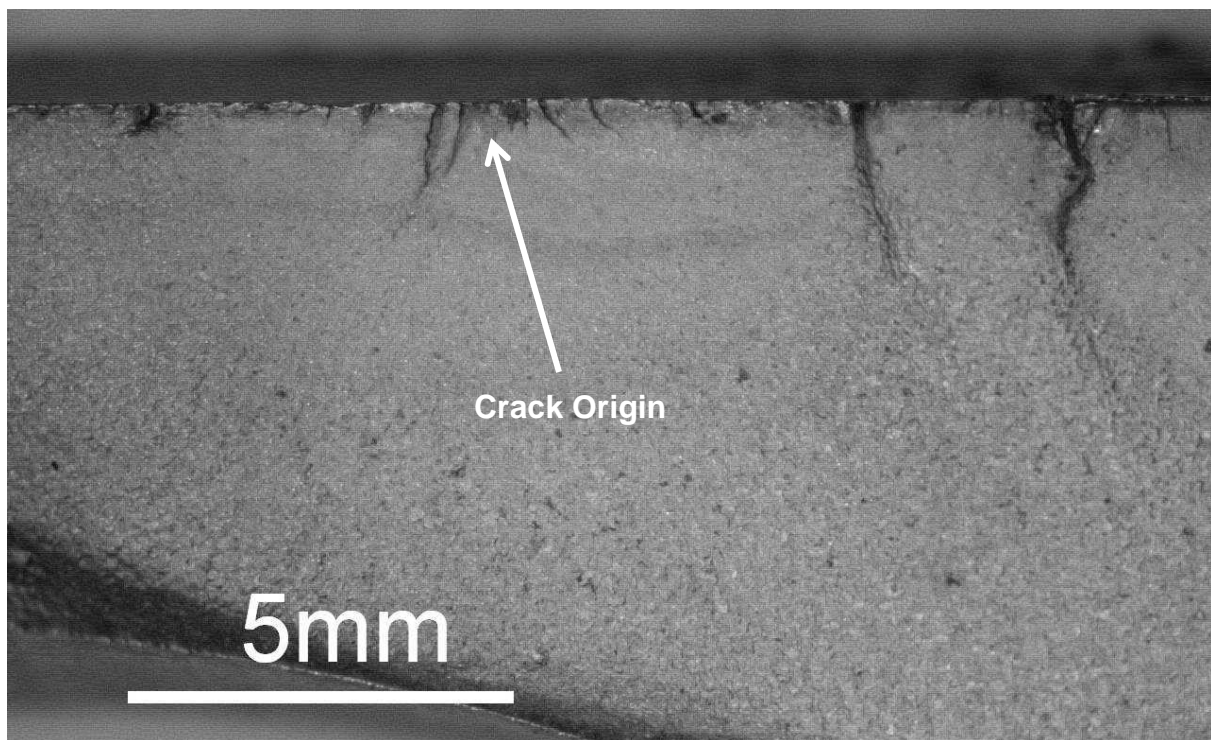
Fracture Surface View of Crack 1 (PT0099)
